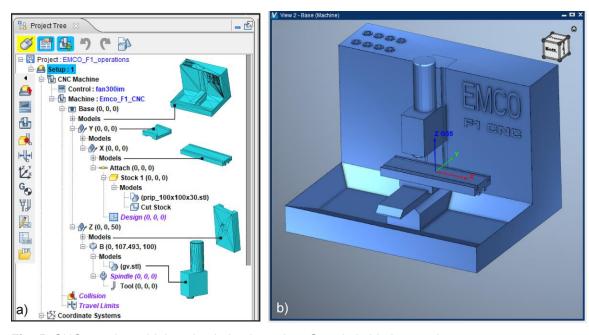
CNC wood machining simulation based on G-code in Vericut environment
